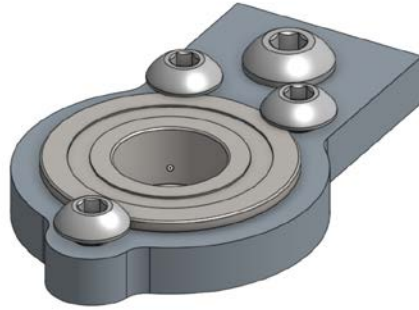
CAD Assembly of Drive Shaft Bracket and Ball Roller Bearing
